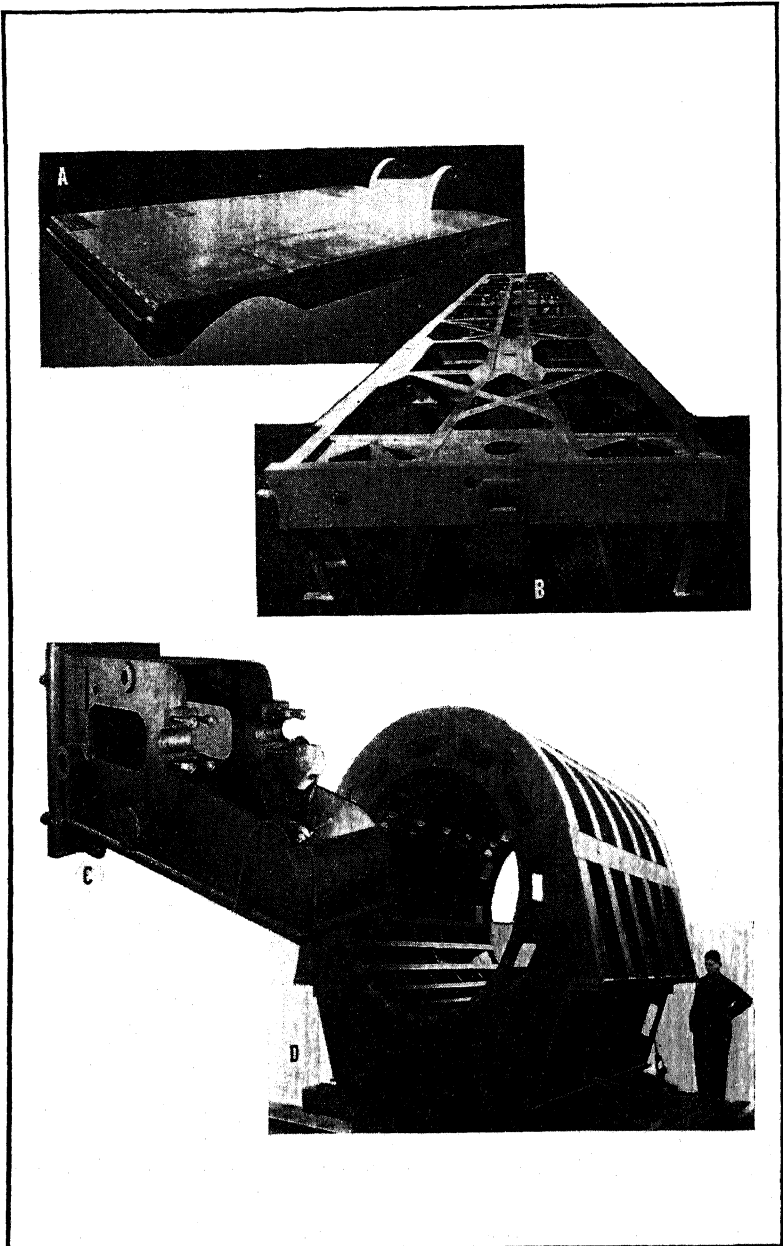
FRAMES—(A) Frame for heavy duty trailer. (B) Underframe for railroad passenger car. (C) 5-ton press housing. (D) 25-ton turbo-generator frame.
